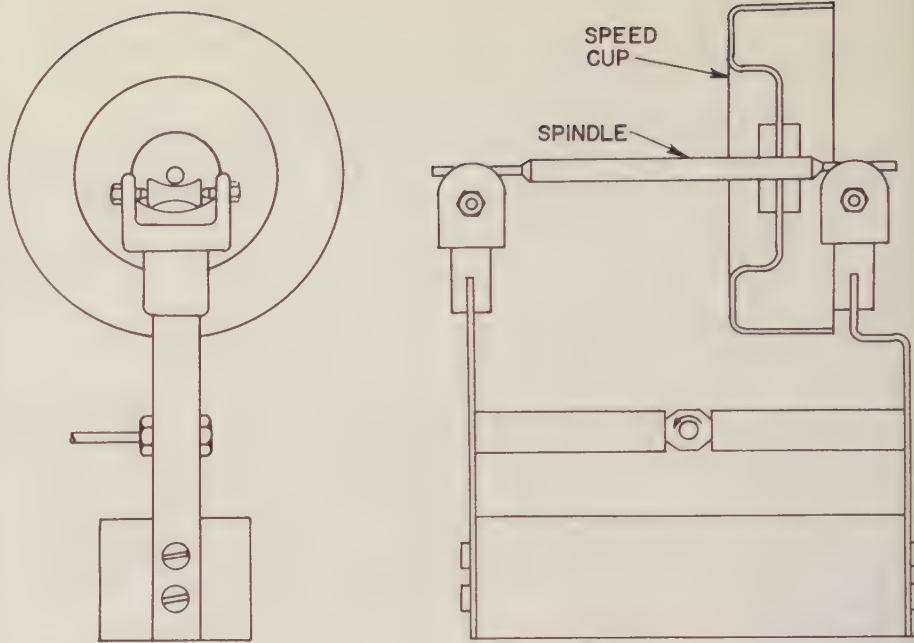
The heavy side of the speed cup first must be determined prior to the hole punching operation. This is accomplished by placing the cup with attached spindle on oscillating roller bearings. The bearings oscillate parallel to the spindle length and cause the heavy side of the cup to rotate downward and rest at the bottom.
